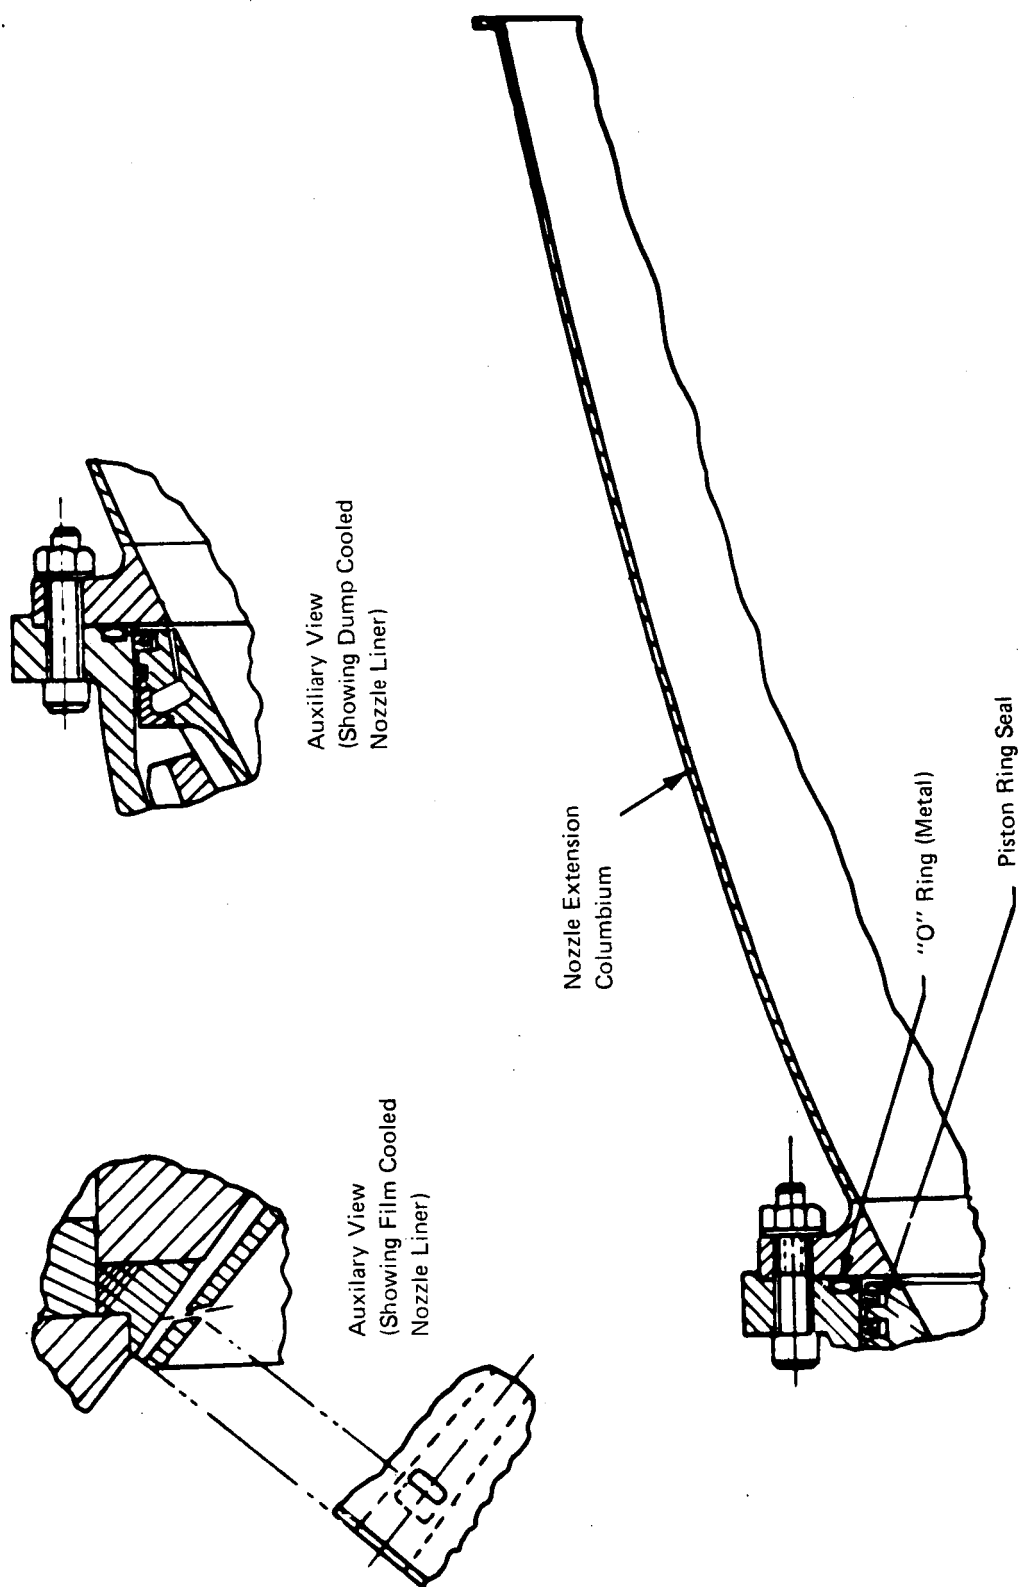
Cooled Chamber Design Details and Cb Nozzle Extension
